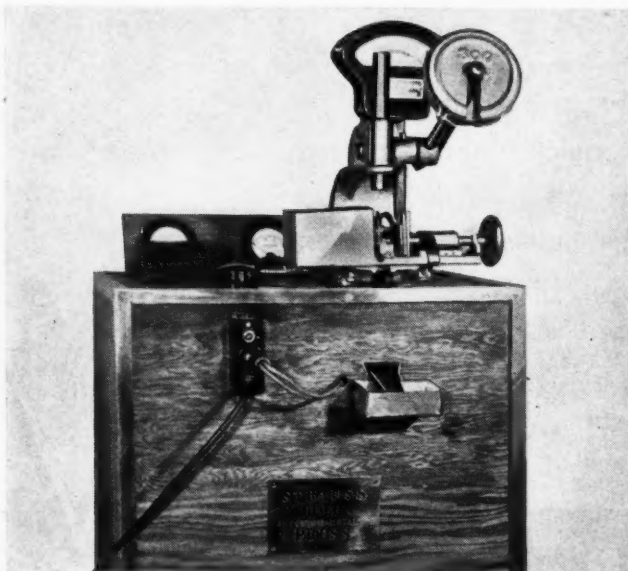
Strauss Hot Powdered-metal Press Manufactured by the National Diamond Hone & Wheel Co.
